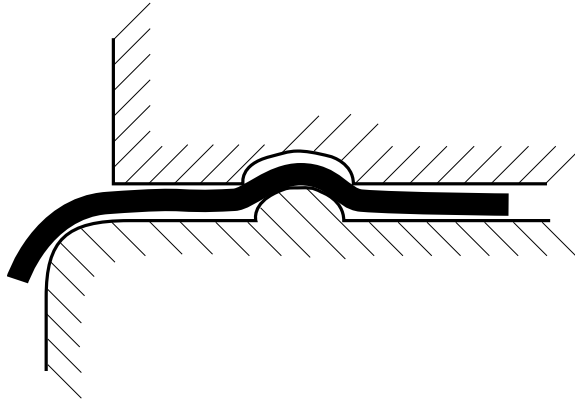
A typical drawbead used to limit slip between the blank and die.
